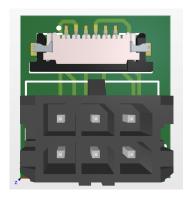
3D1 PCB 7: Programming Periphery Board
